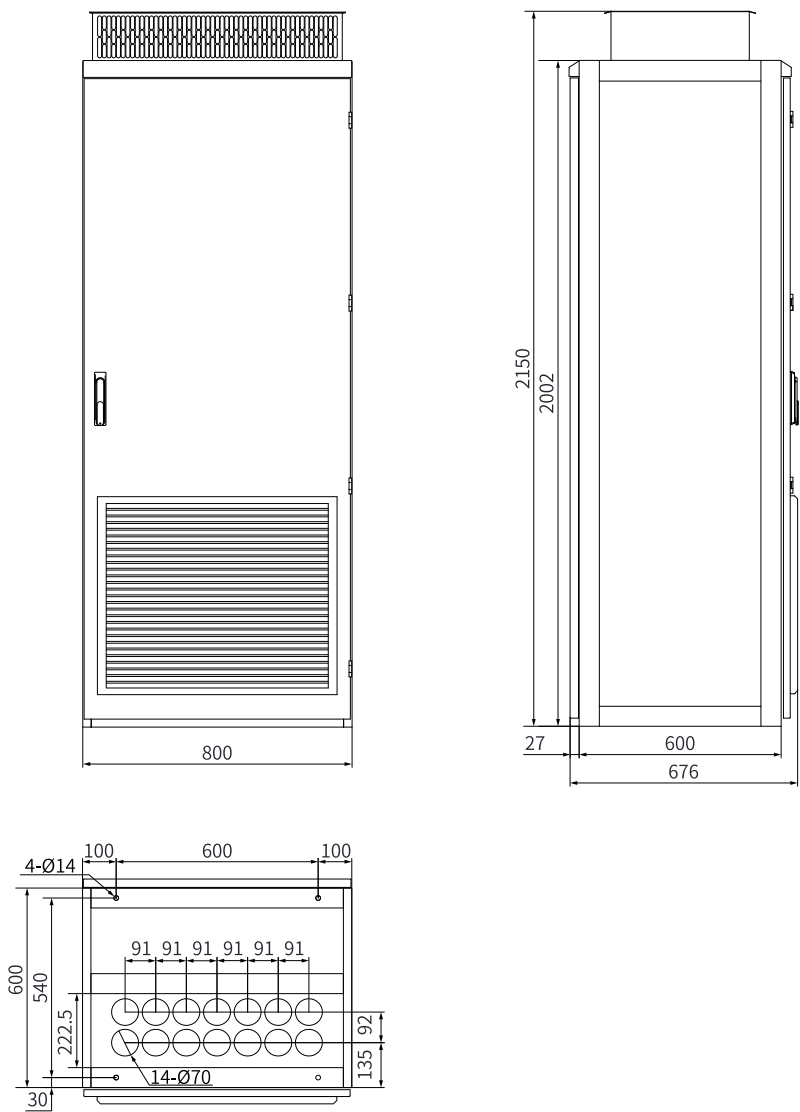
800-mm wide H6/H7 drive cabinet (mm)
